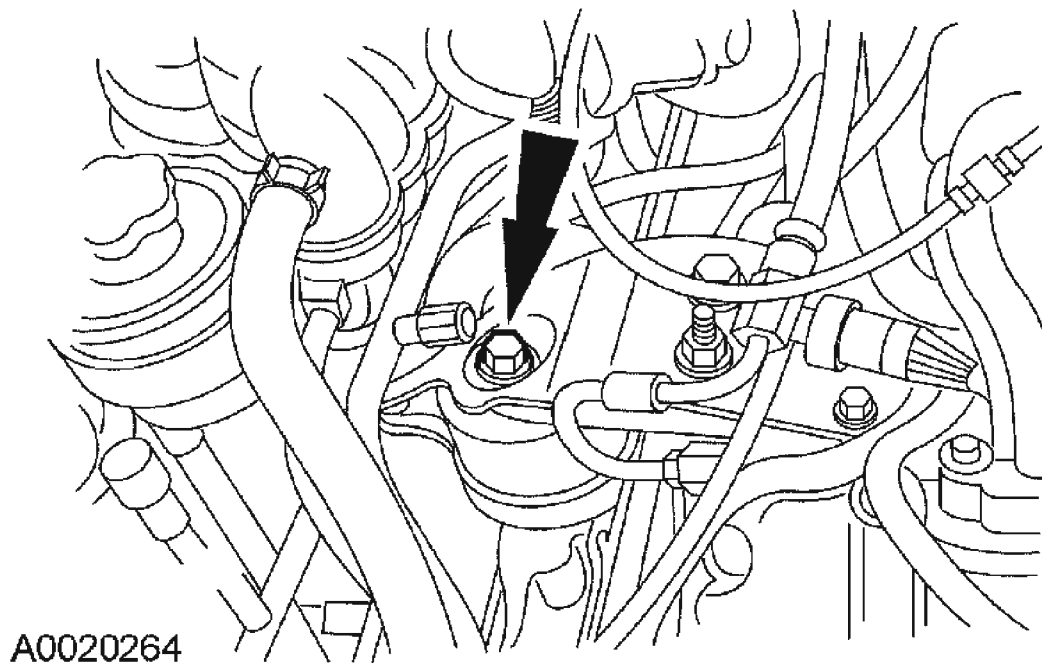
Removing Upper Transaxle Retaining Bolts
